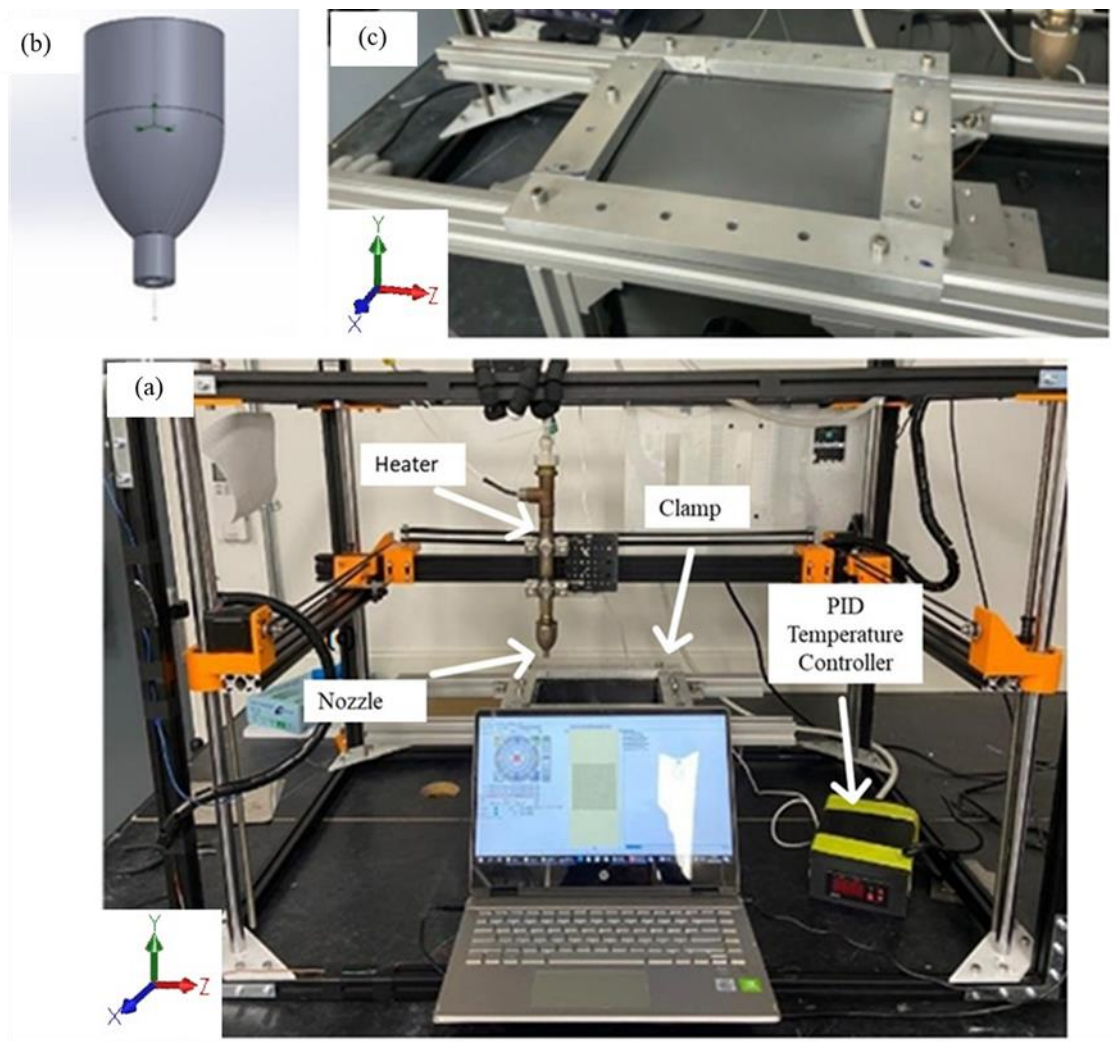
(a) Full setup, (b) The forming tool, and (c) Fixture for the PC sheet.
